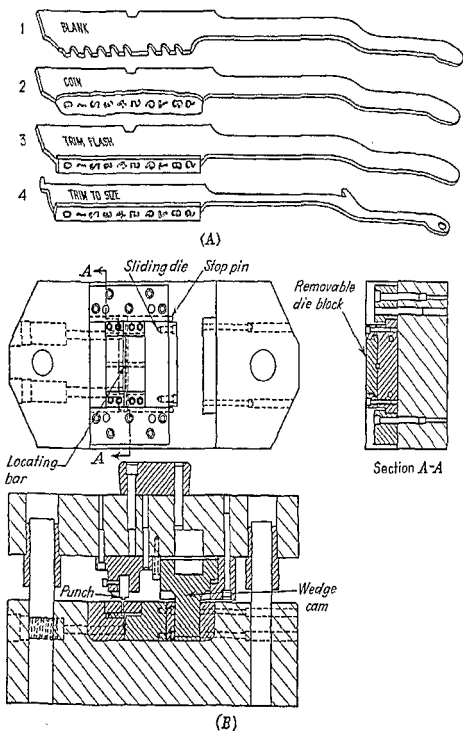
Swage and coin die for single-piece type bar. (Monroe Calculating Machine Co.)
